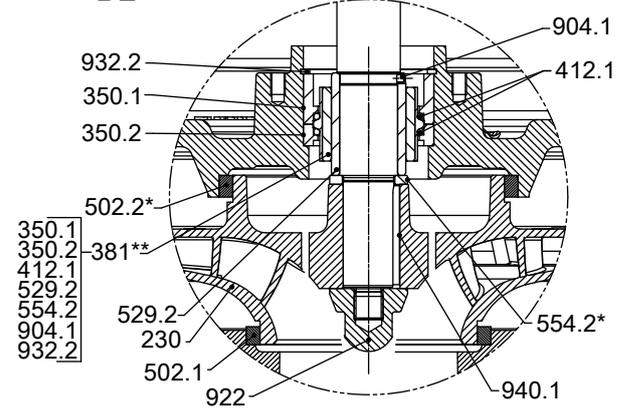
Detail drawings of hydraulic system (depending on bearing size)
